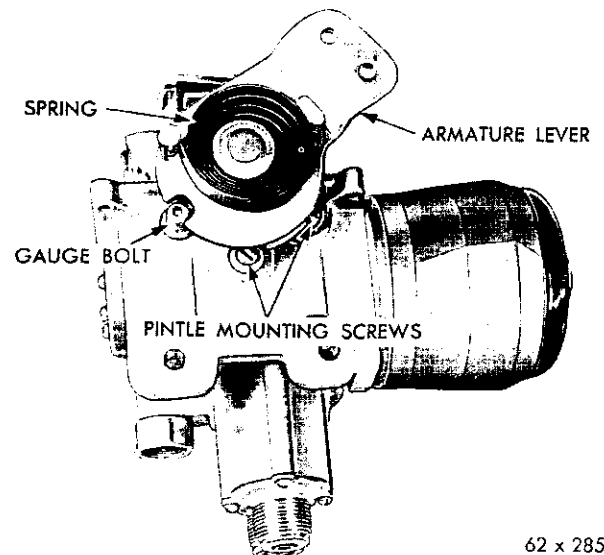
Removing the Pintle Screws and Gauge Bolt
